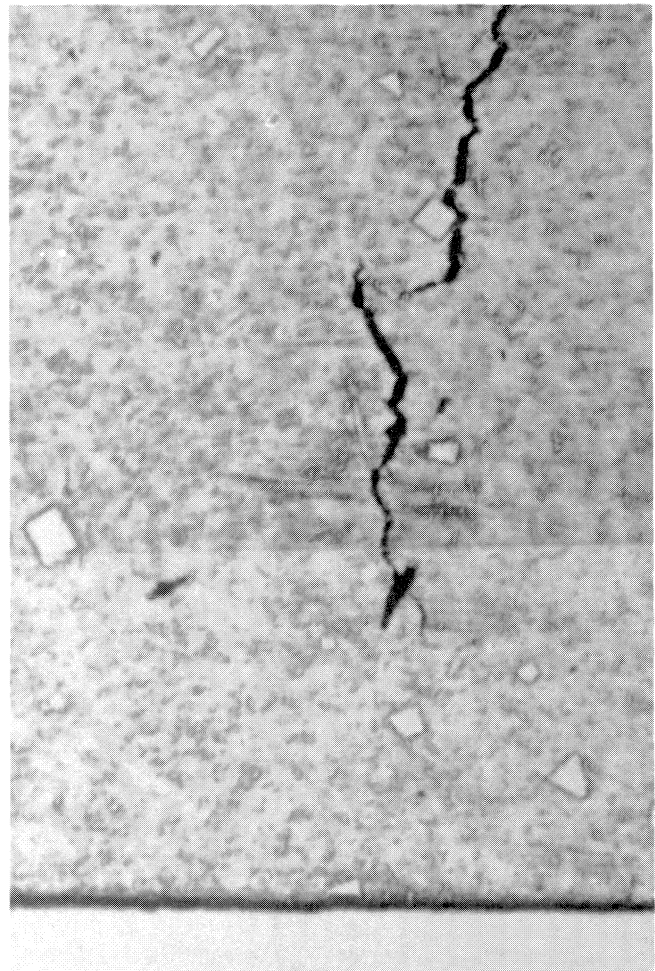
Fatigue Crack Extending from Surface toward Babbitt Bond.
